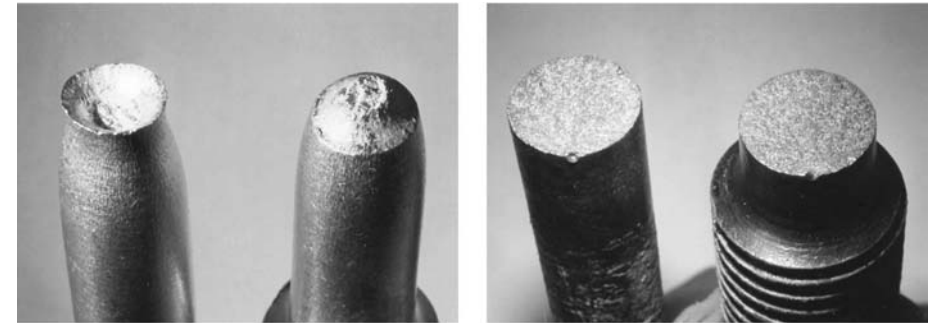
(a) Cup-and-cone fracture in aluminum. (b) Brittle fracture in a mild steel.
